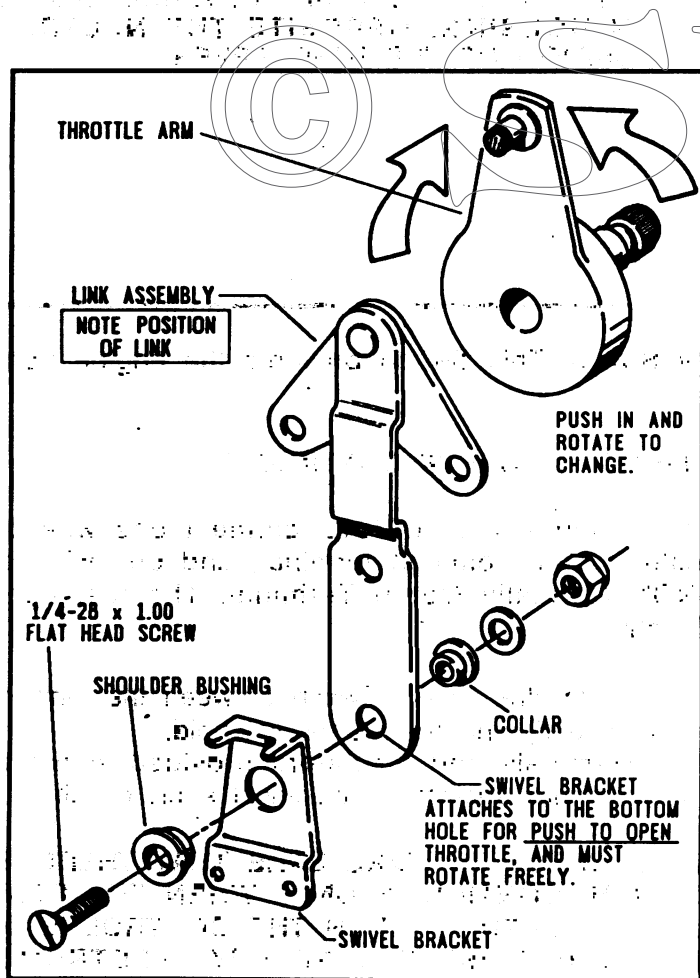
PUSH-TO-OPEN CONFIGURATION
